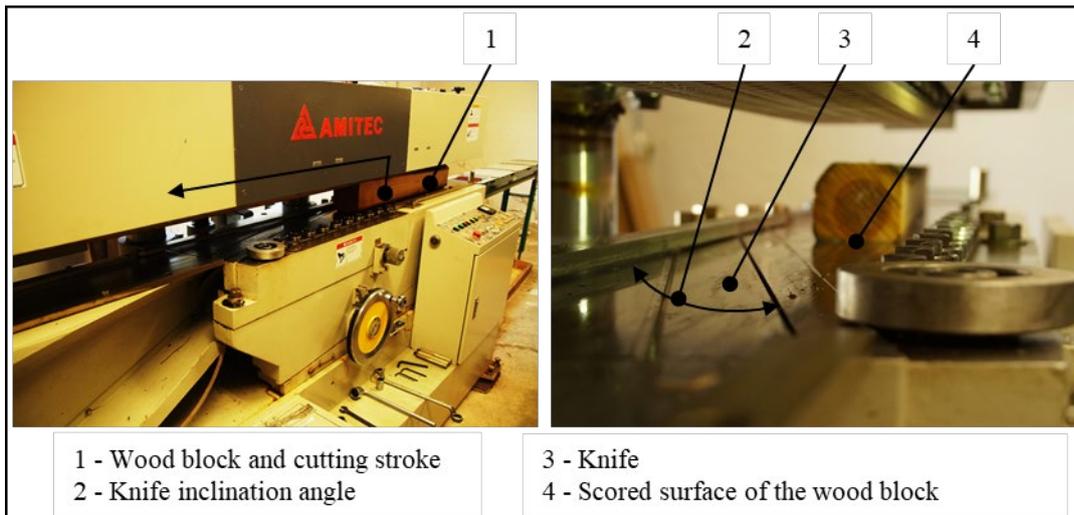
Veneer slicer used for planing wood wool out of a previously scored wood block
